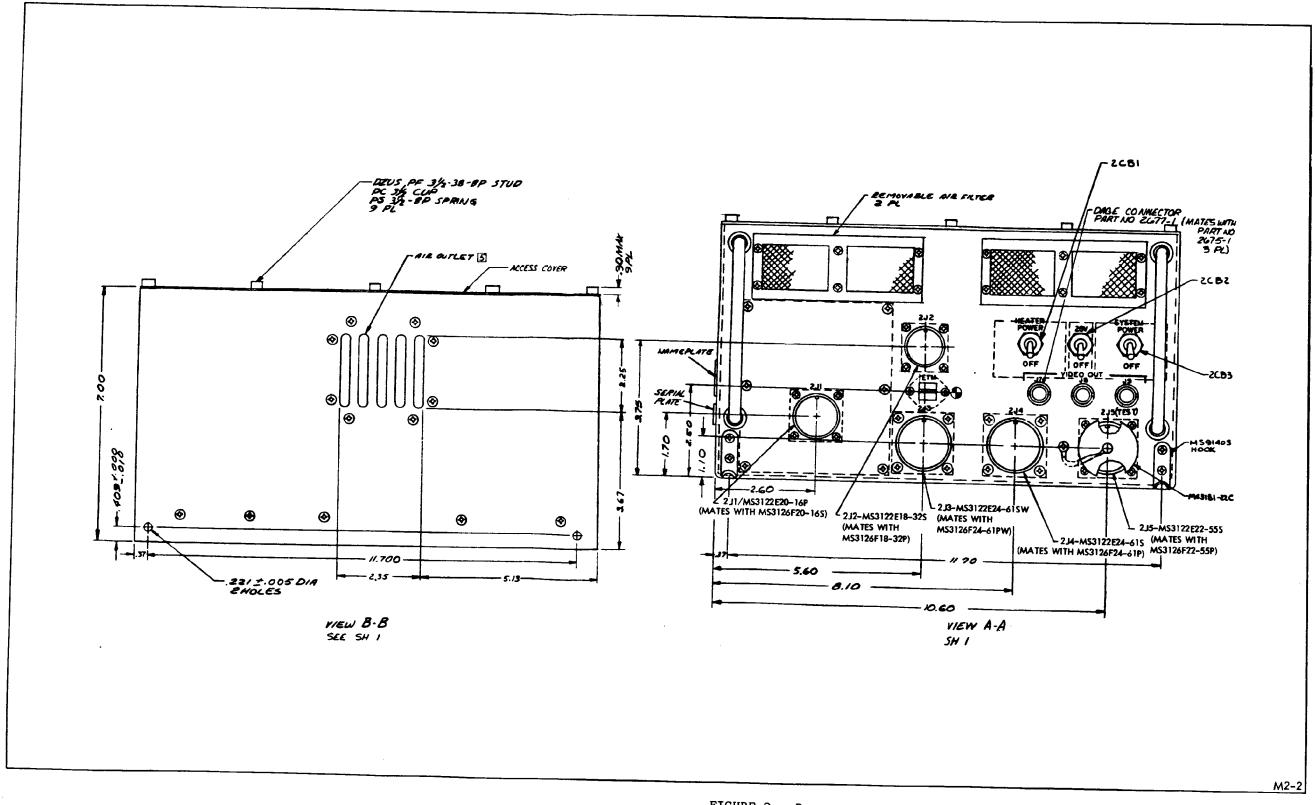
Power supply/video converter, outline drawing. (sheet 2 of 2)
